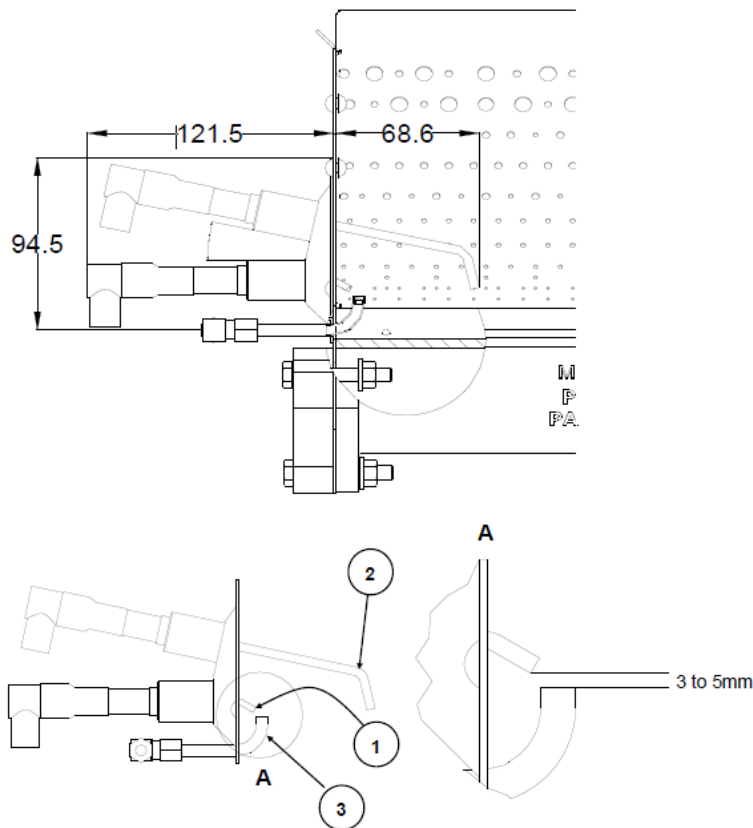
shows the HMA2A Pilot Assembly mounting details including:
